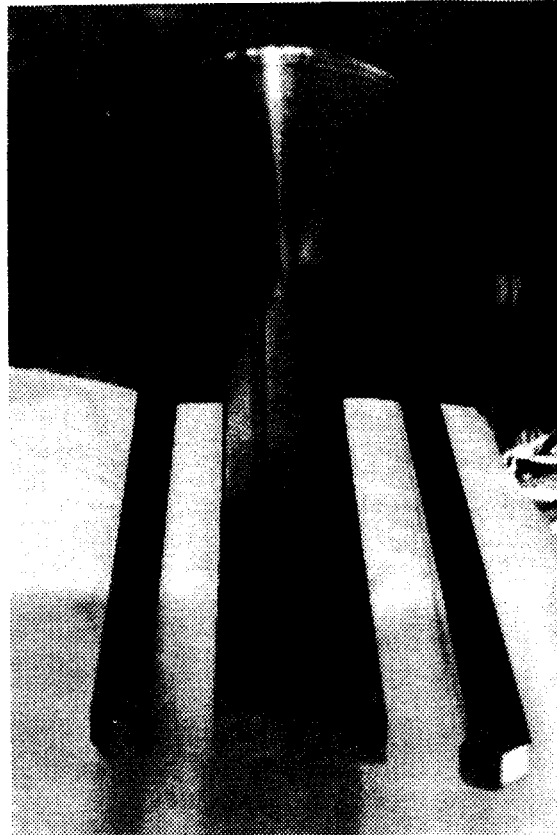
Photograph of stainless steel tubing assembly attached to 16-inch flange (Alcator vacuum side). The beryllium windows can be seen at the end of each tube. The tubes are about 1 m long.
